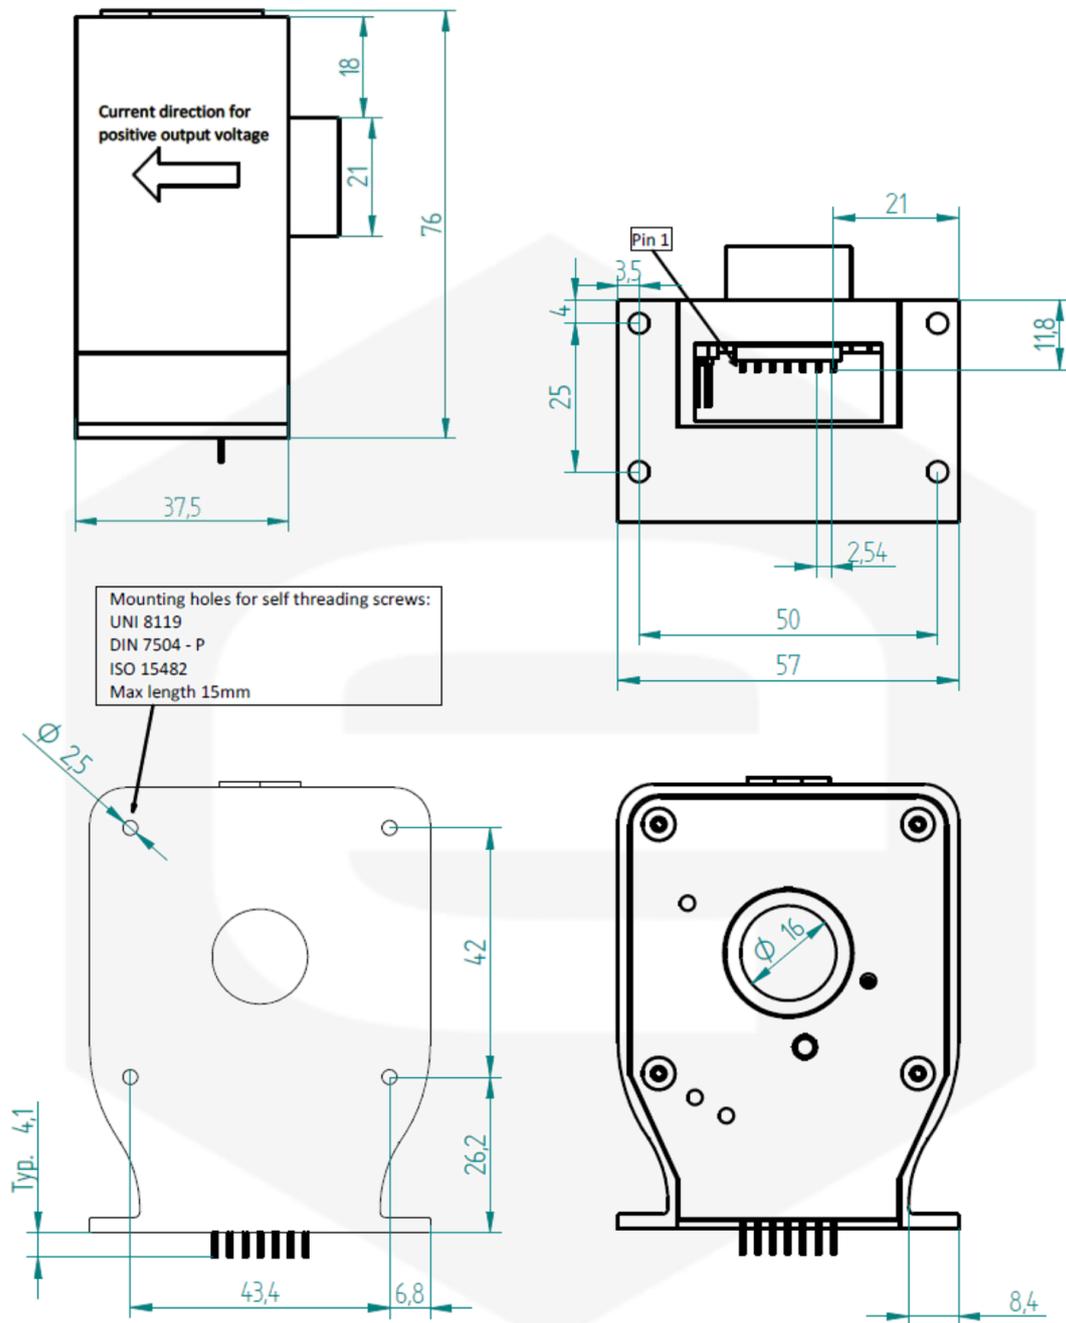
Mechanical drawings for CT-100/CT-150 Series “P” Version
